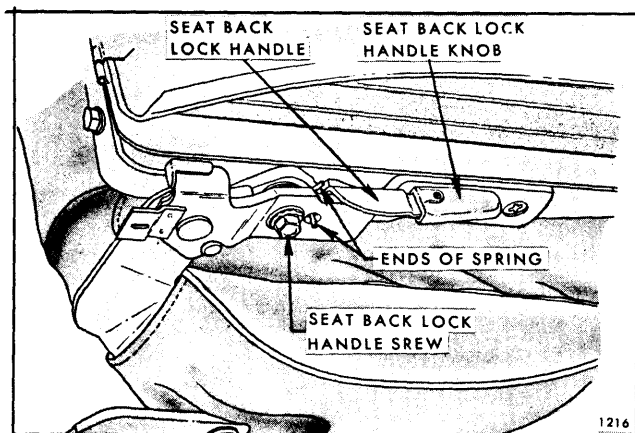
Seat Back Lock (Vista Cruiser and Sport Wagon Styles)
